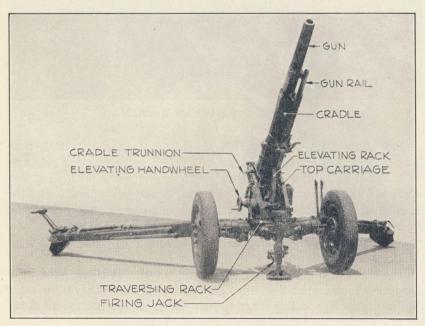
75-mm. Gun Carriage, M2, firing position.
